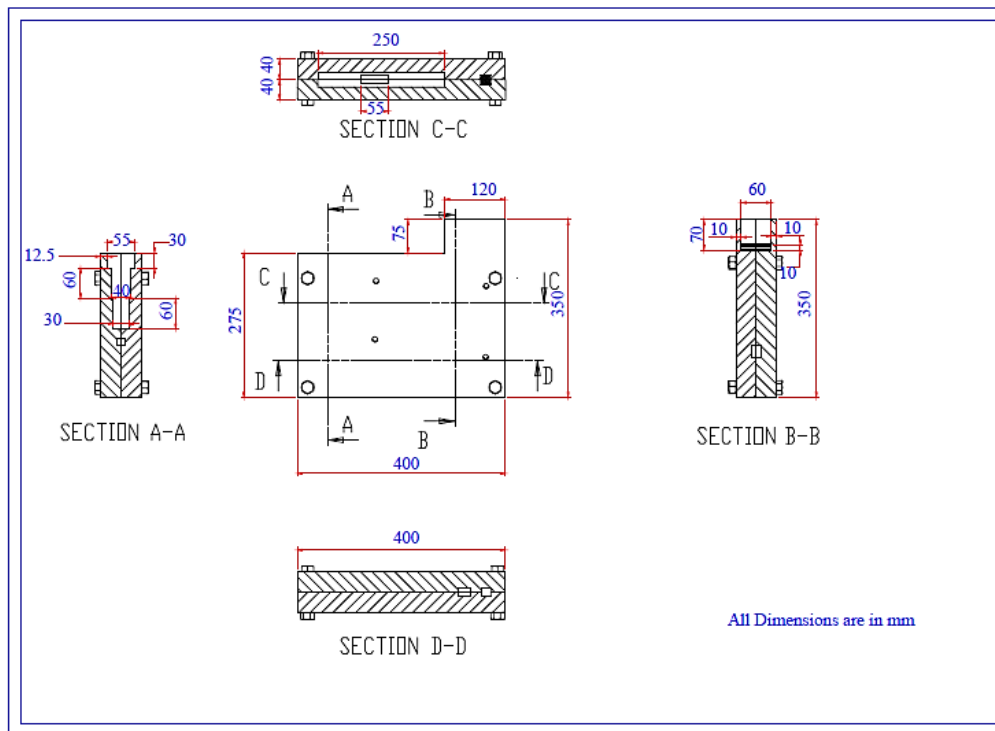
Fabrication drawing with dimensions of the permanent mould..
